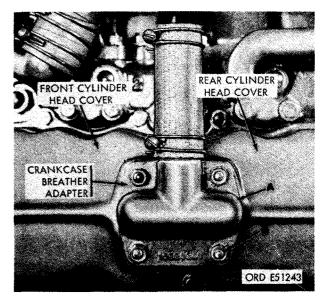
INSTALLING CRANKCASE BREATHER ADAPTER.
